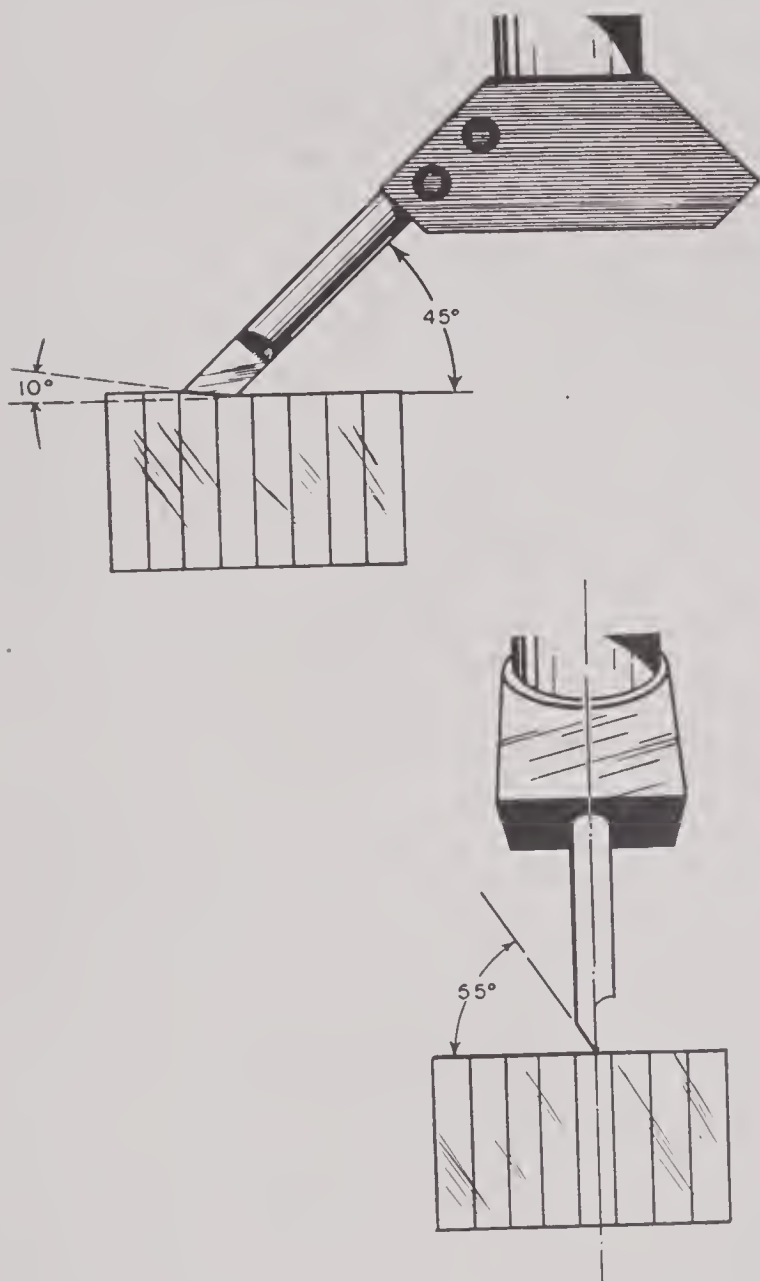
Position of stellite tool in vertical milling head. Above: Side view showing angle made by tool shank with respect to the horizontal plane and also the cutting angle with respect to the horizontal crystal surface. Below: Edge view showing the zero rake angle and the 55° clearance angle of the stellite cutter.
